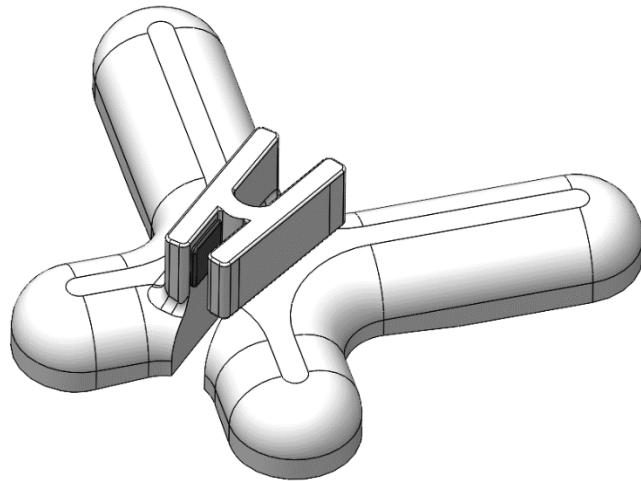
CAD model of the Back Stabilizer assembly
